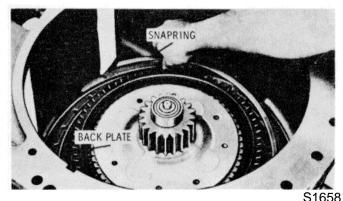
Installing Fifth-and-Sixth-Gear Clutch Backplate Snap Ring
